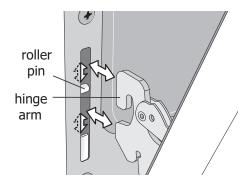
Location of hinge arm and roller pin Removing and Replacing the Warmer Drawer
